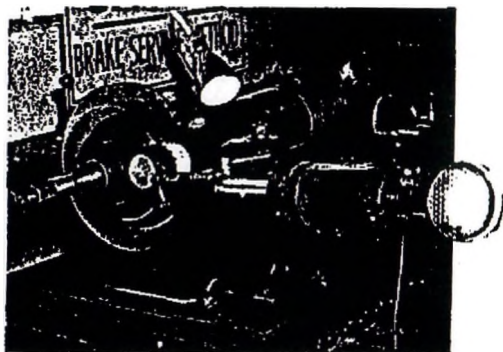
While the Disc is being machined, the caliper may be rebuilt. First remove the boots from their retainers. Later model calipers require that the pistons be removed before the boots.
